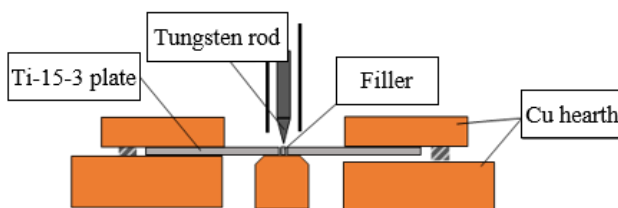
Schematic diagram of the weld setup showing the Ti-15-3 base plate and the filler
